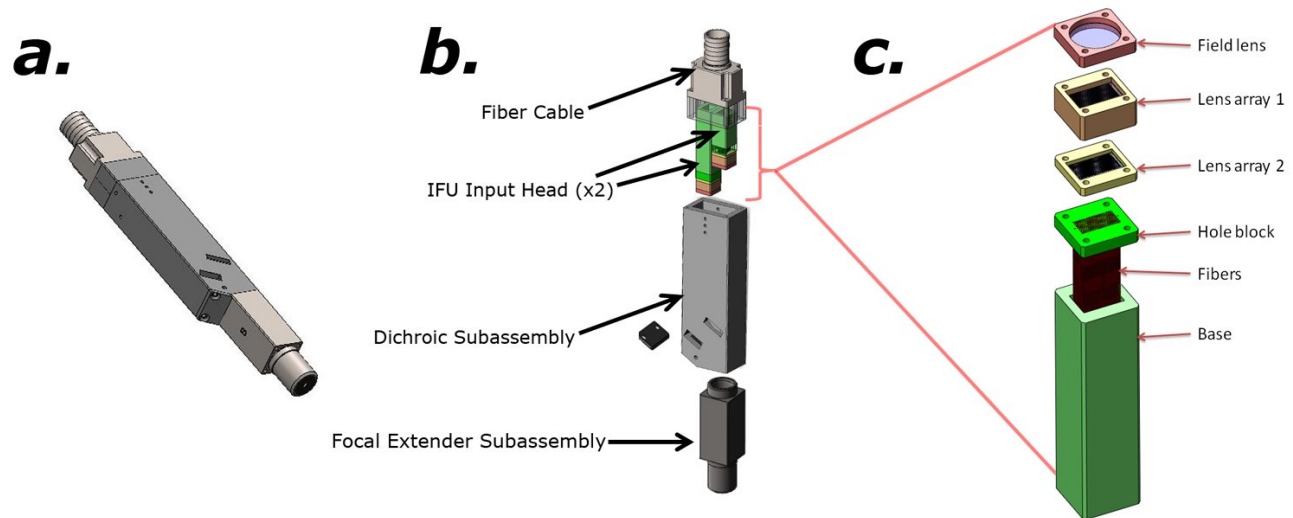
The IFU input mechanical assembly is shown in Panel *a*, and an exploded view with major subassemblies labeled is shown in Panel *b*. Panel *c* shows an exploded view of one of the two input head assemblies.
